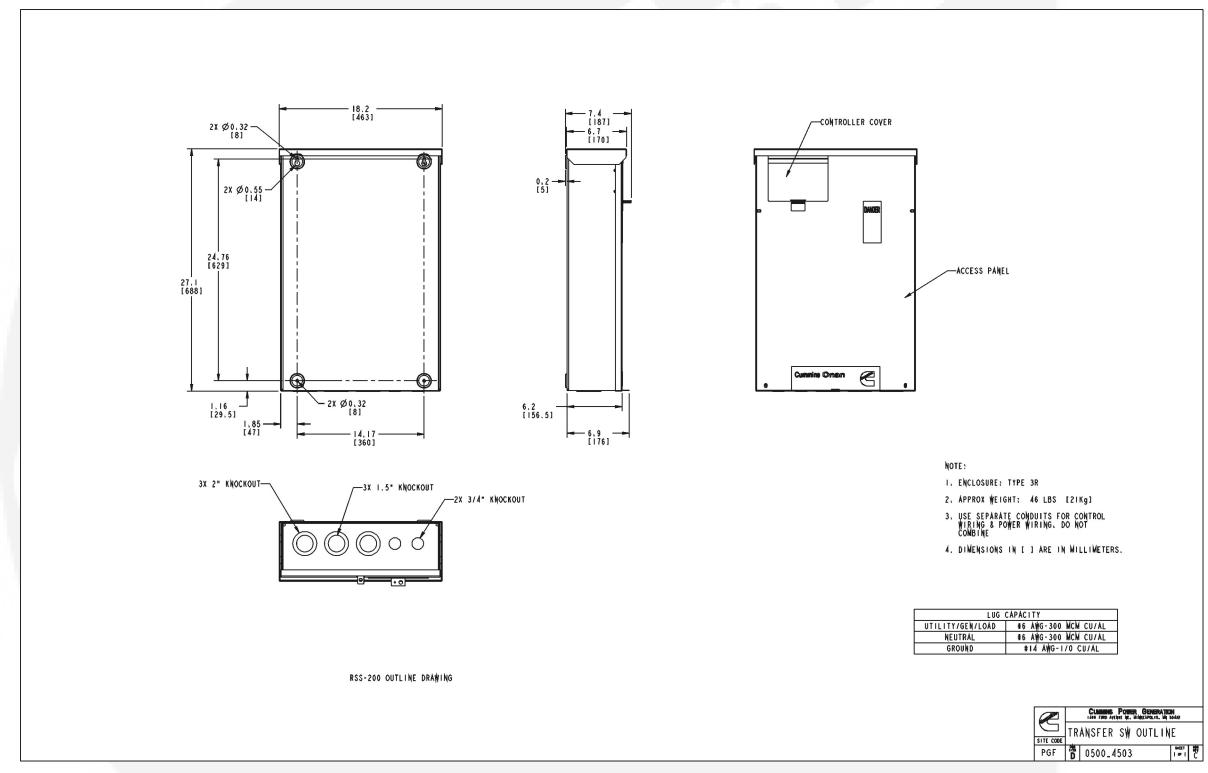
CONTROL BOX OUTLINE DRAWING WITH CONTROLLER
